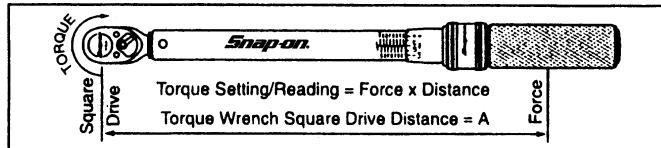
Fastener torque equals torque wrench square drive torque.
